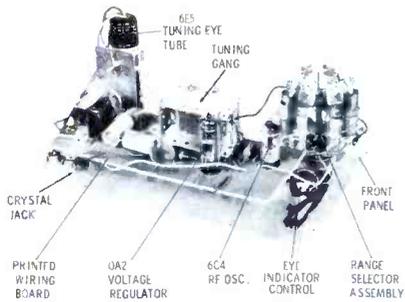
Components and printed wiring in Model 97 make a light-weight unit.
